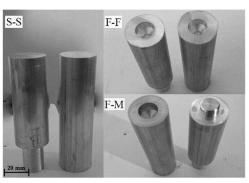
Three types of samples prepared for welding: (1) Simple geometry (S-S); (2) Geometry with hole on the workpiece (F-F); (3) Geometry with pin and hole on the workpiece (F-M)
